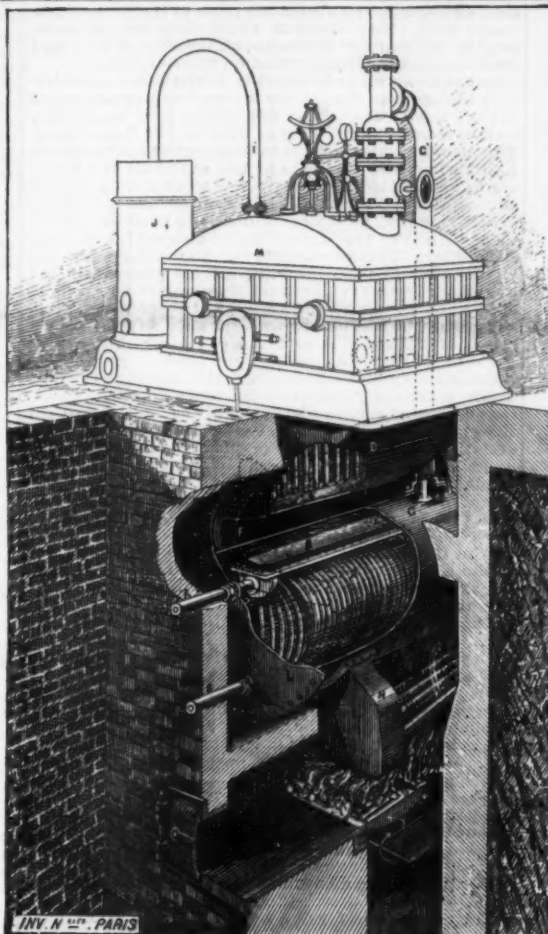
SECTION OF SUSINI'S ETHER ENGINE.
